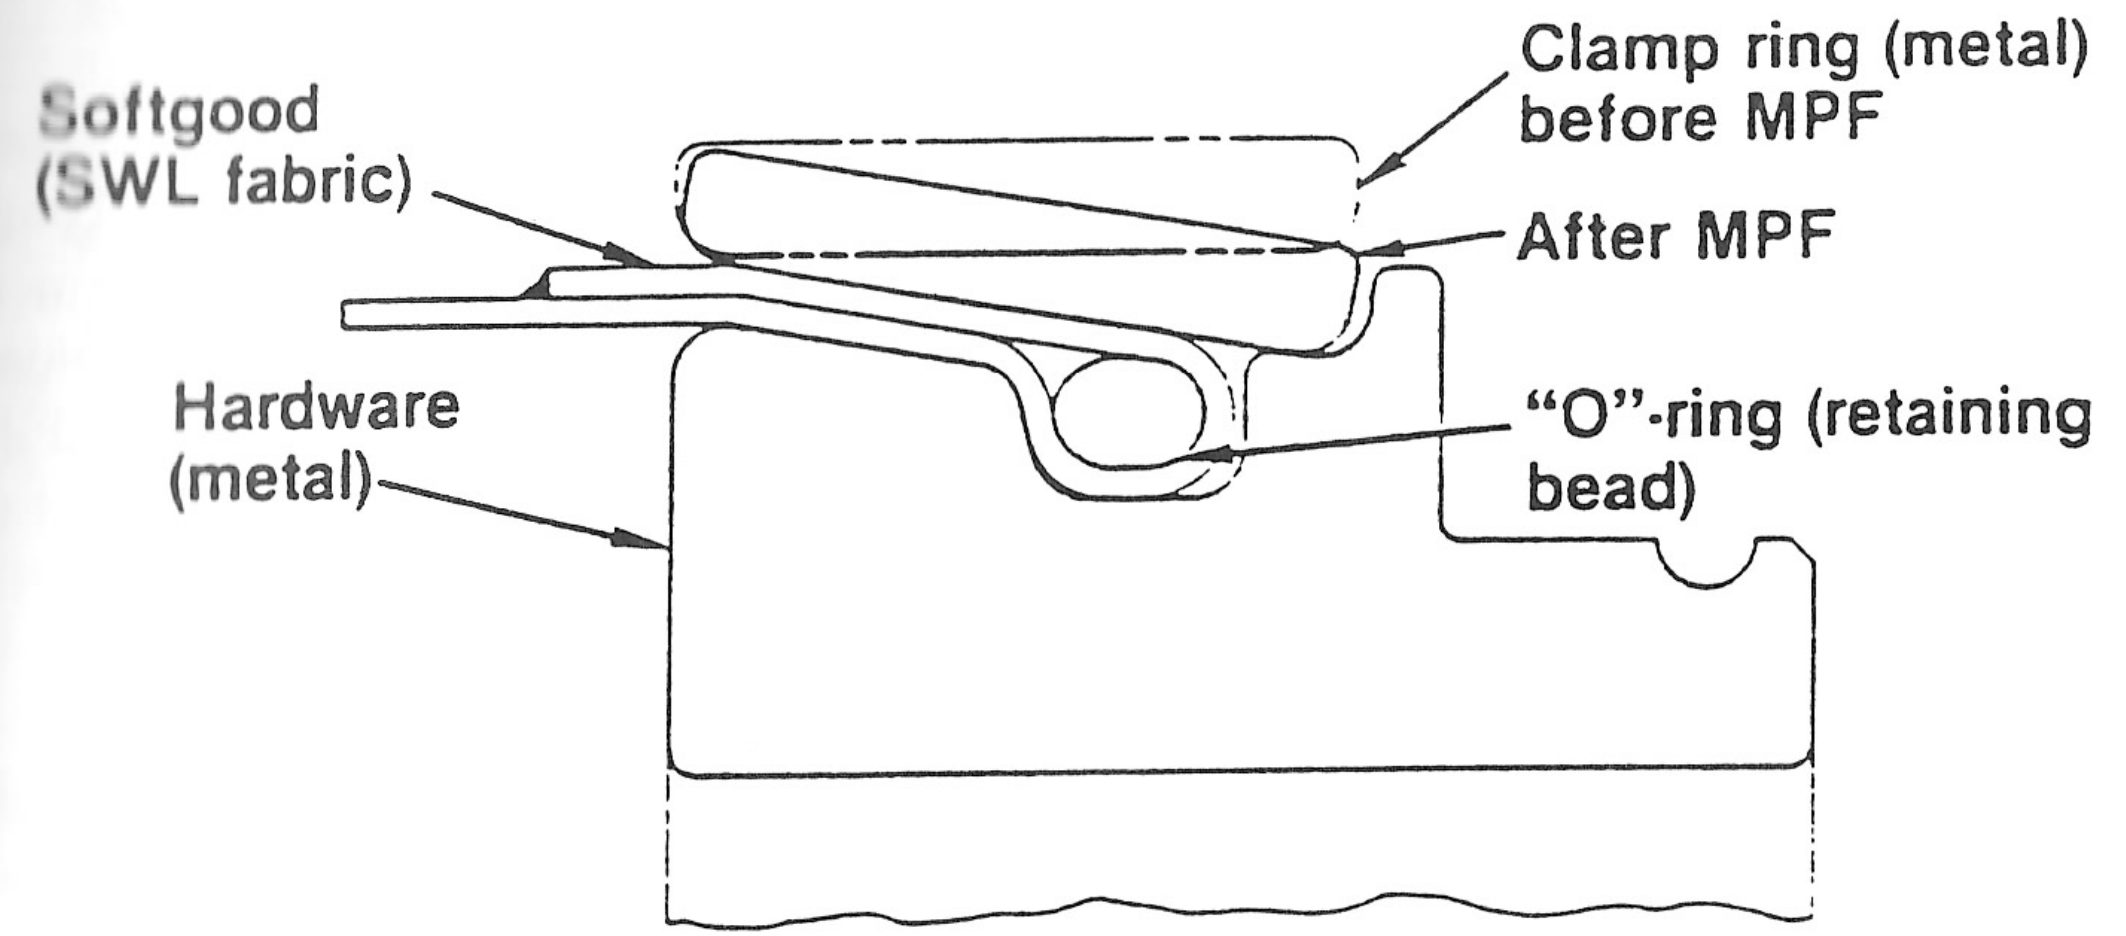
Bolted clamp and penetration fabric attachment method (courtesy of NASA).
